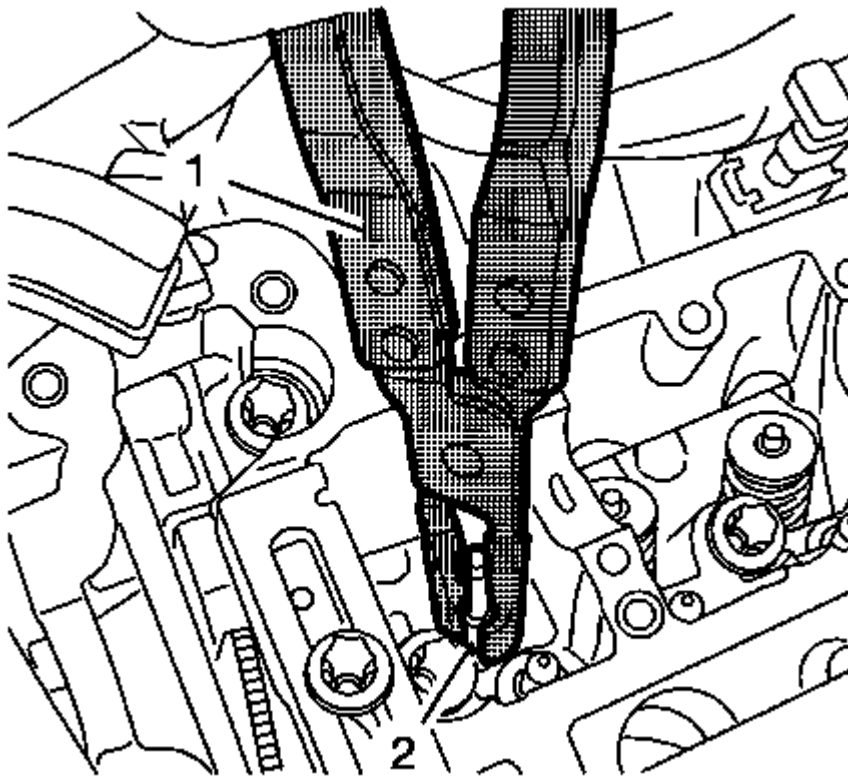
Pliers And Intake Valve Stem Oil Seals
